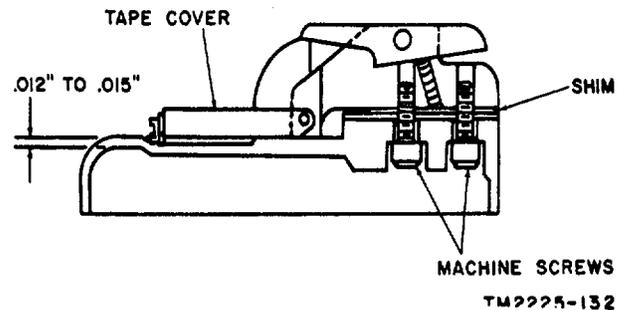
Tape cover clearance adjustment (TT-76A/GGC and later models)
